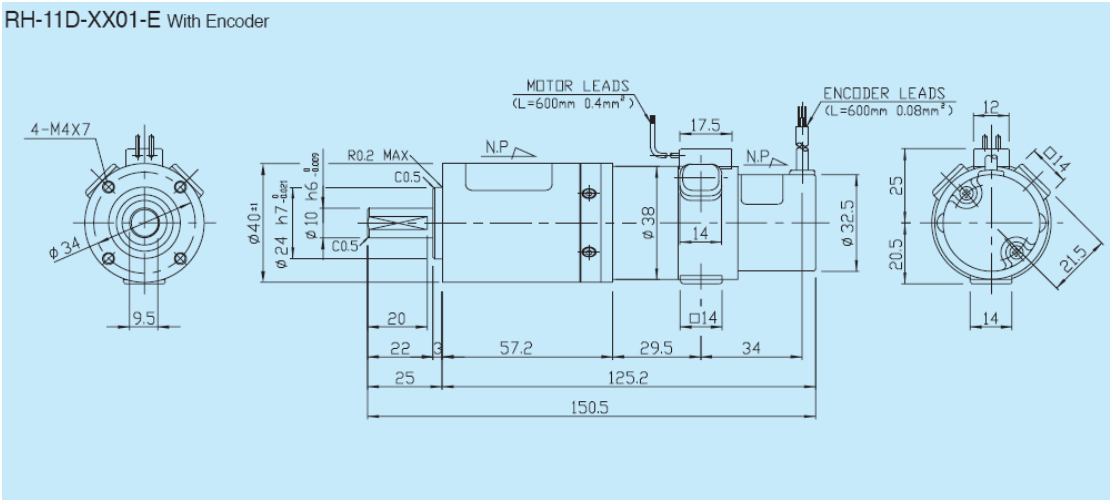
Mechanical drawing of the DC motor (Harmonic drive 2006)
